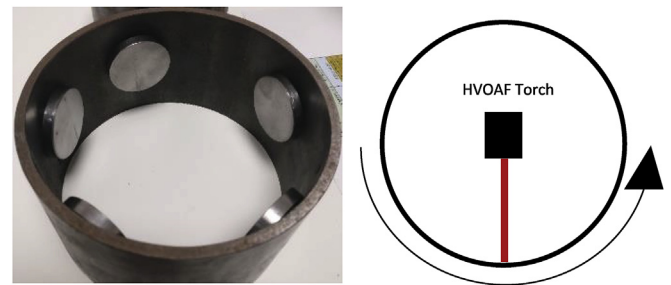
Photograph and plan view schematic of ID coating deposition setup (drawing not to scale). The torch was fixed in x and y directions and the pipe holding the substrates rotated during deposition.
